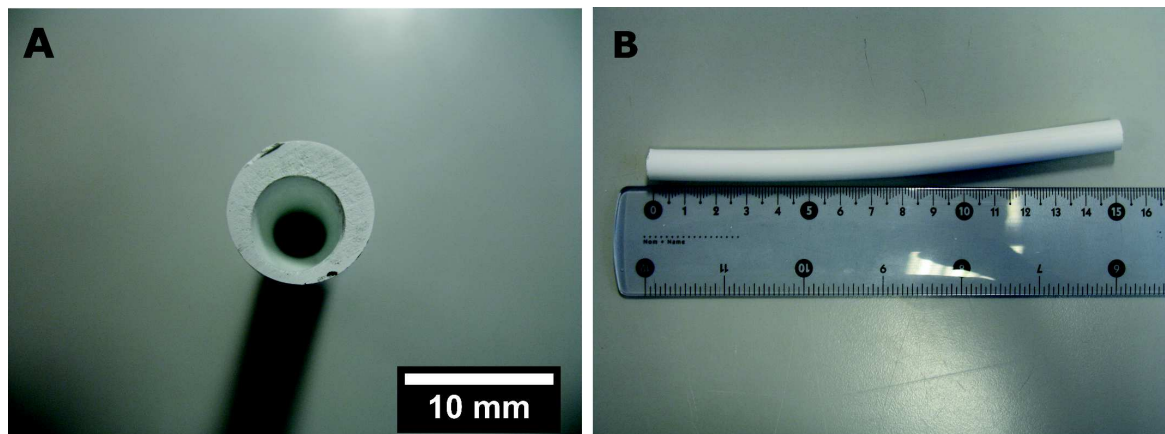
Details of the geometrical defects found in tubes made by rotational freezing. A) eccentricity, B) warping.
